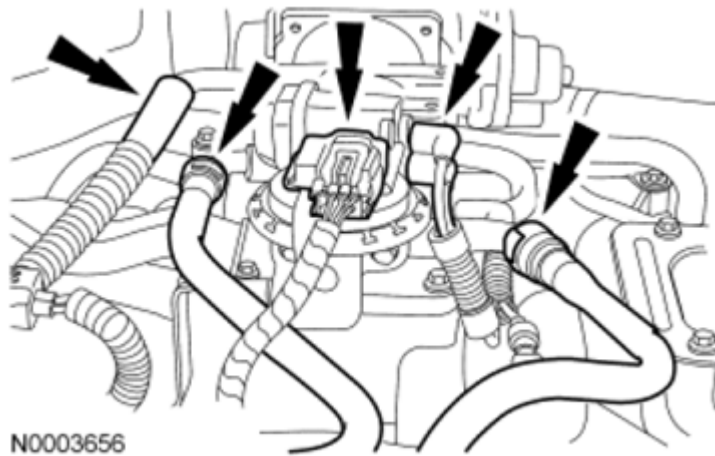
Locating Electrical Connector And Vacuum Hoses
